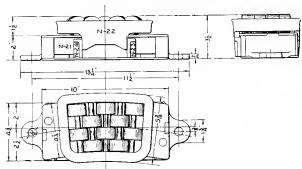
Creco Roller Side Bearing No. 4A for Four-Wheel Passenger Train Car Trucks.
